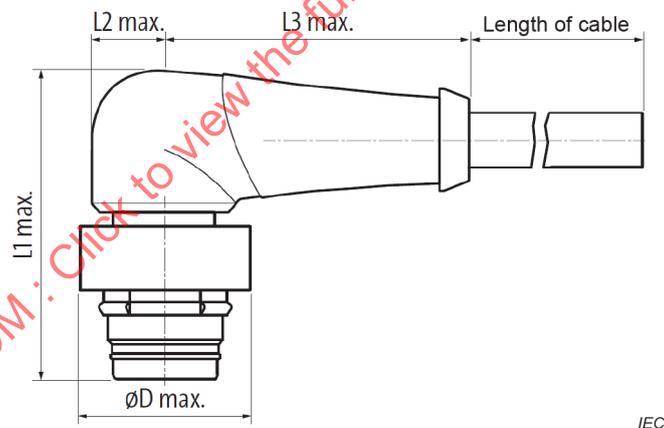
Non-rewireable connector, male contacts, angled version, with inner push-pull locking
